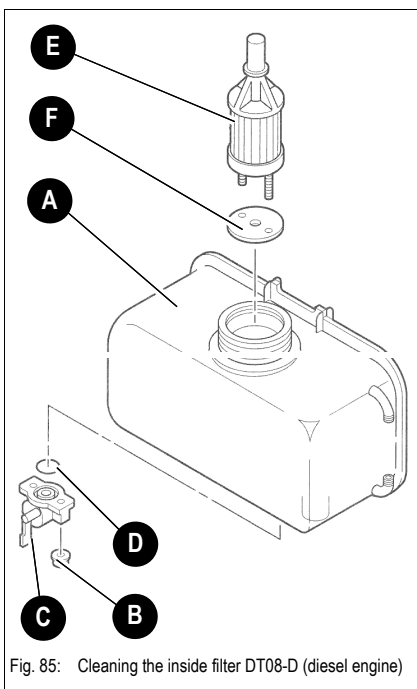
Cleaning the inside filter DT08-D (diesel engine)
